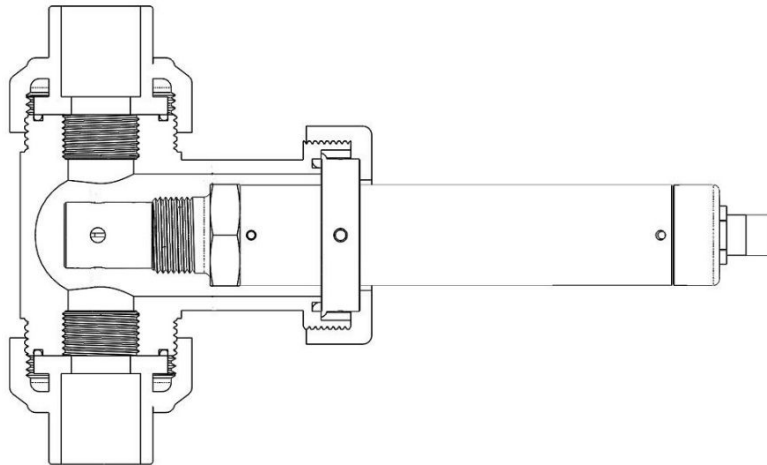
A. Installation in ST-001 (CPVC) Inline Tee Assembly
